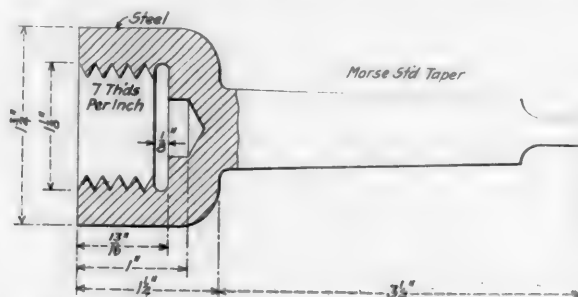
Chuck for Holding the Cup or Spherical Grinder
